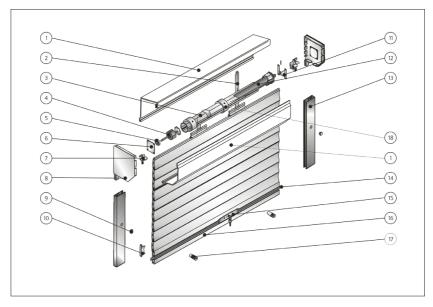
Roller shutter with the assistance and push-up mechanism.
